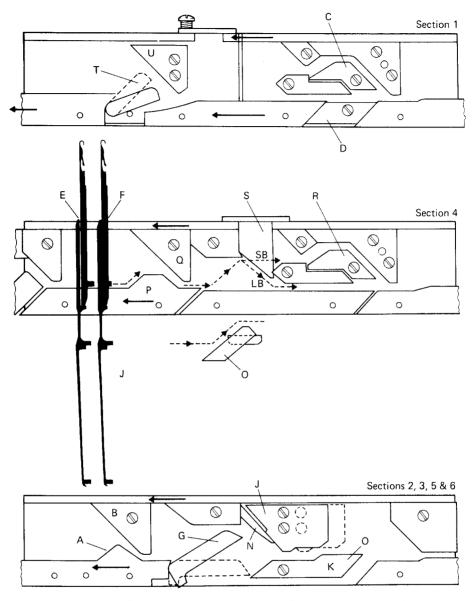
Cylinder cam system of an RTR rib loop transfer machine.
